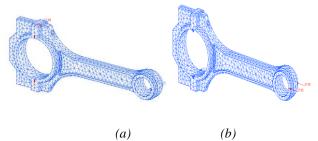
(a) Tensile load at crank end and fixed at pin end; (b) Tensile load at pin end and fixed at crank end.
